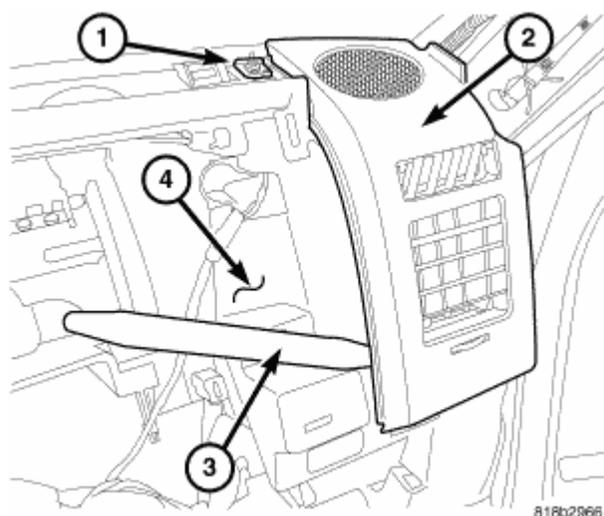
Screw, Air Outlet, Trim Stick C-4755 & Instrument Panel
